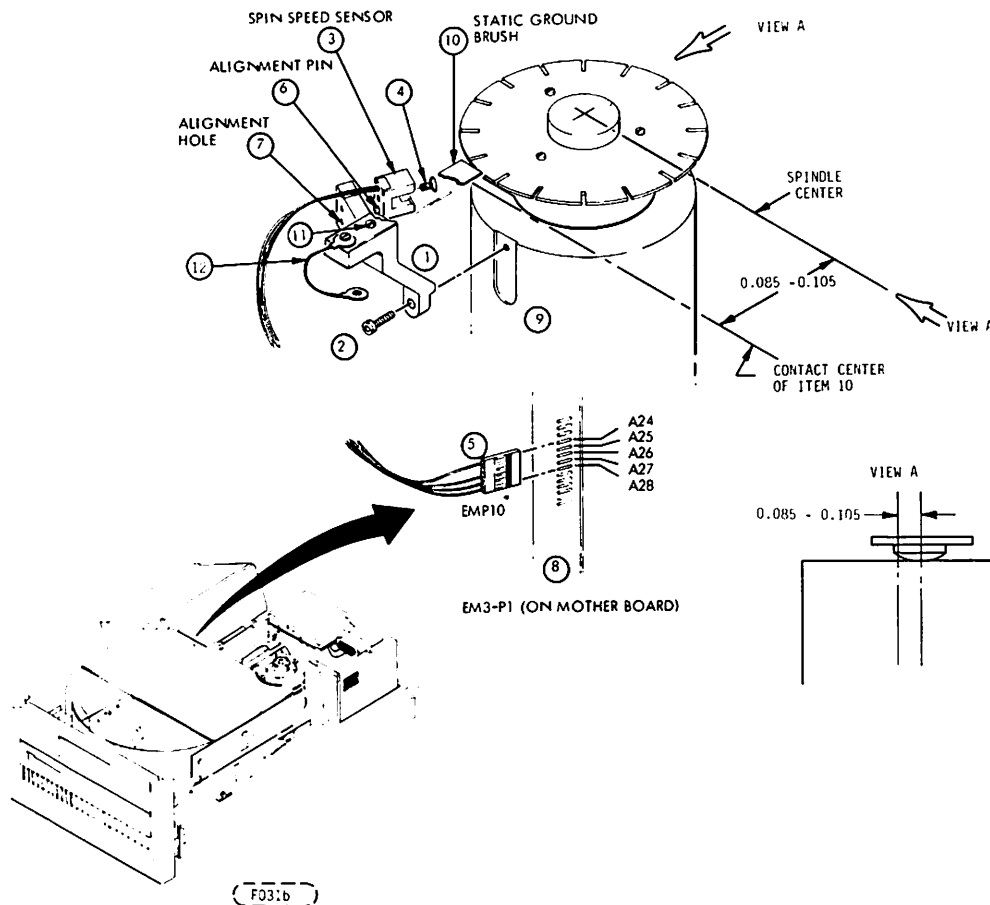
REMOVAL AND REPLACEMENT OF SPIN SPEED SENSOR ASSEMBLY
